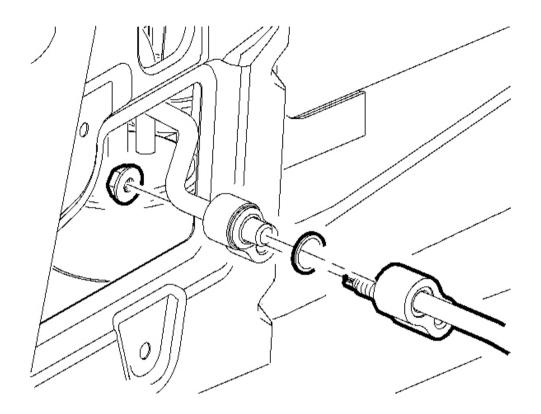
Liquid Line, Nut & TXV Courtesy of GENERAL MOTORS CORP.
